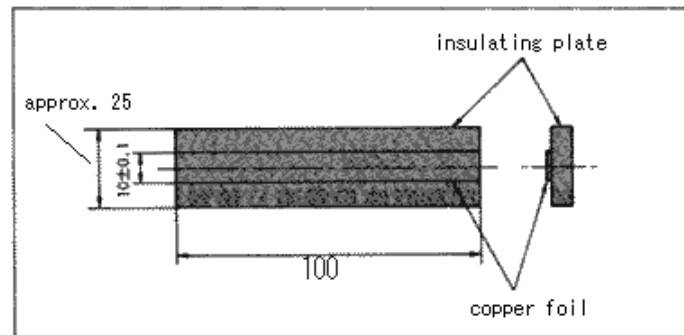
Test Piece Cut Out of a Printed Circuit Board
